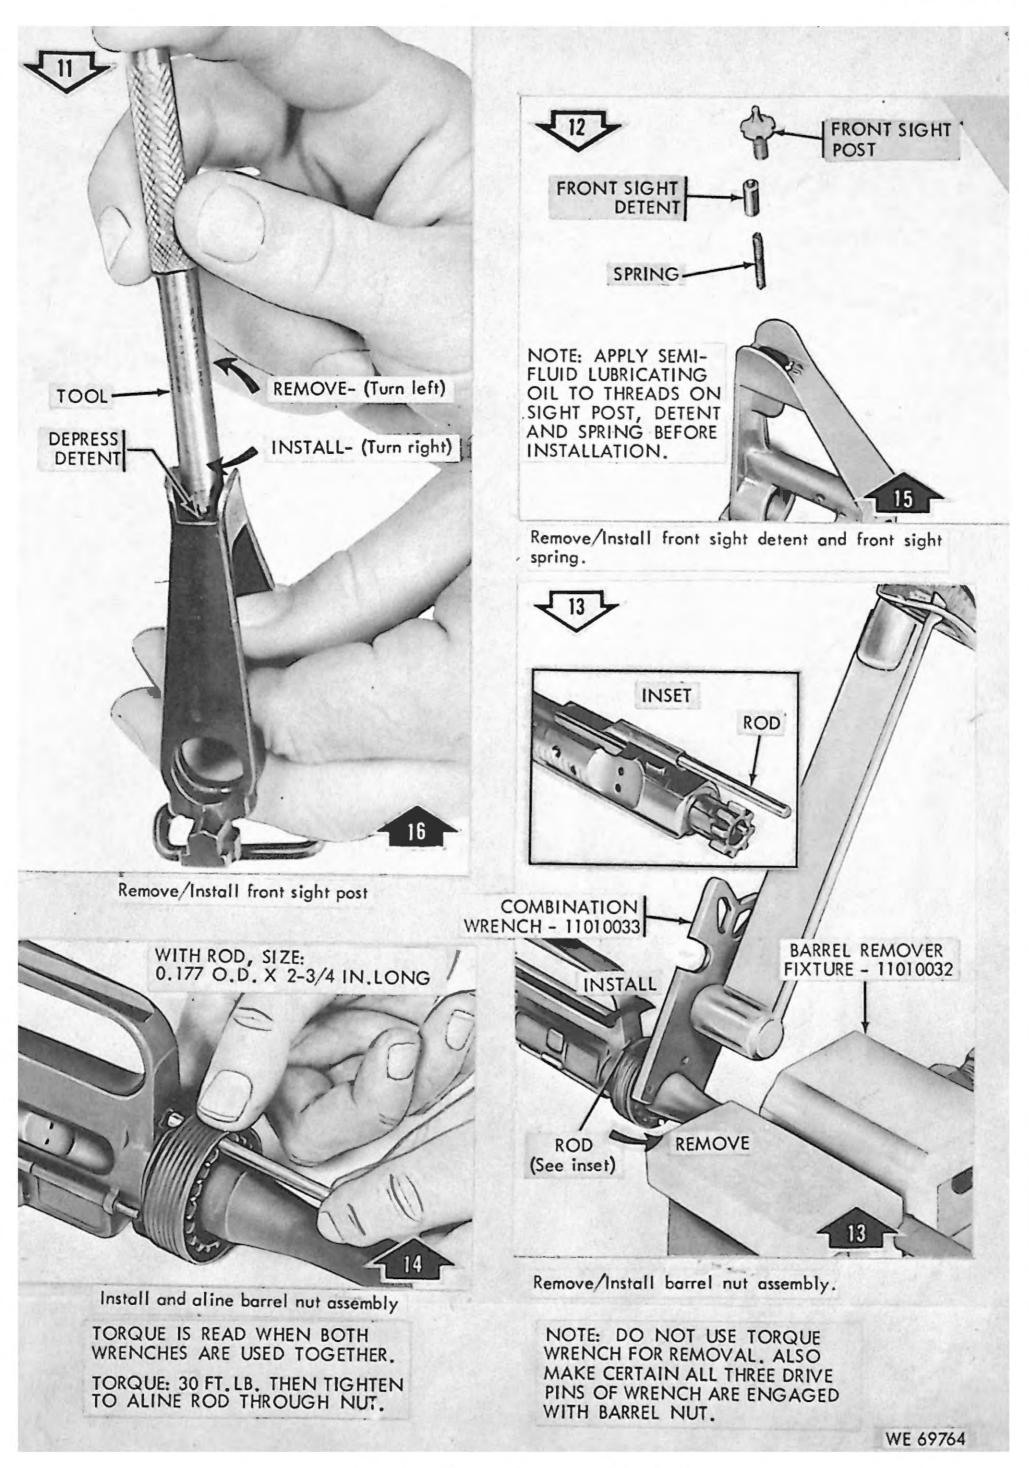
Disassembly/assembly of upper receiver group. (3 of 6)
